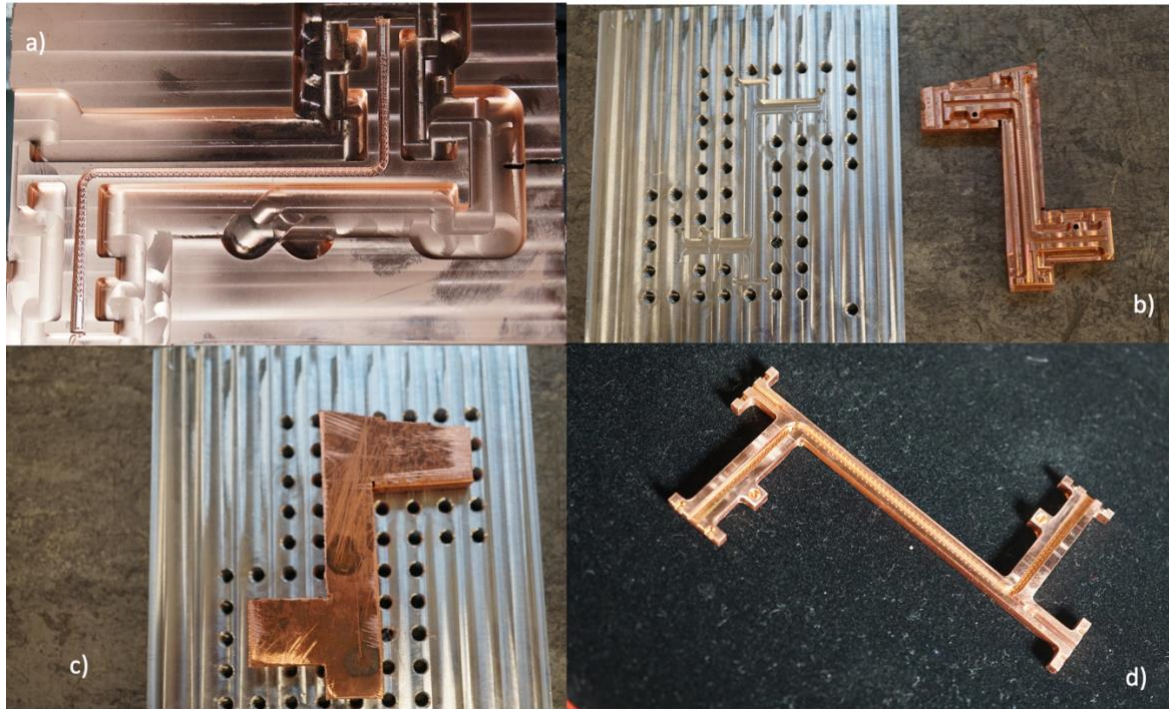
Four fabrication step of DCW block with waveguide and pillars by CNC machining: a) DCW machined, b) figure and DCW with the copper block residual, c) DCW inserted in the figure, d) final DCW block.
